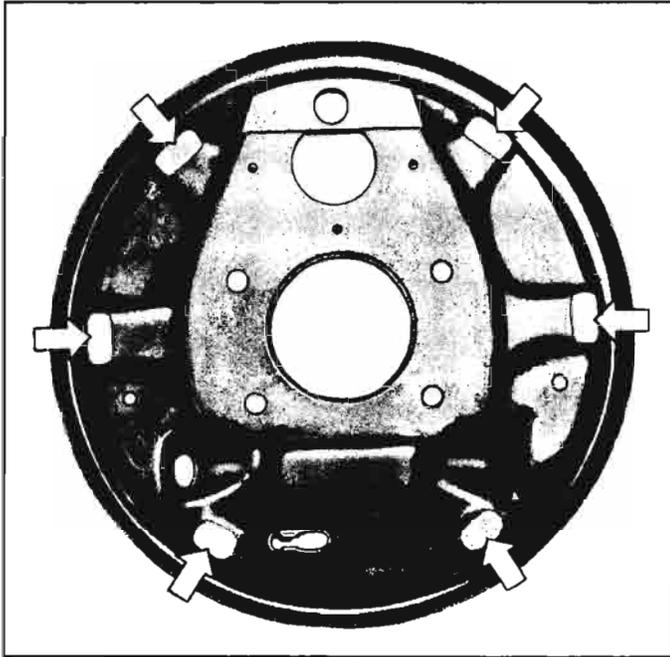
Shoe Contact Surfaces on Flange Plate
